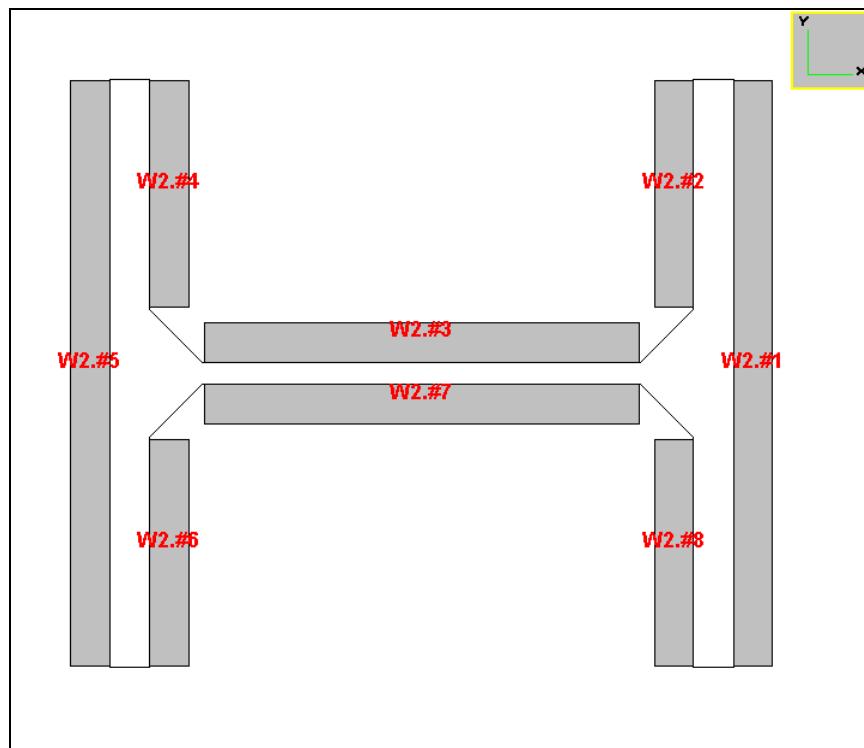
Lower weld layout (W2): fillet welds numbering
